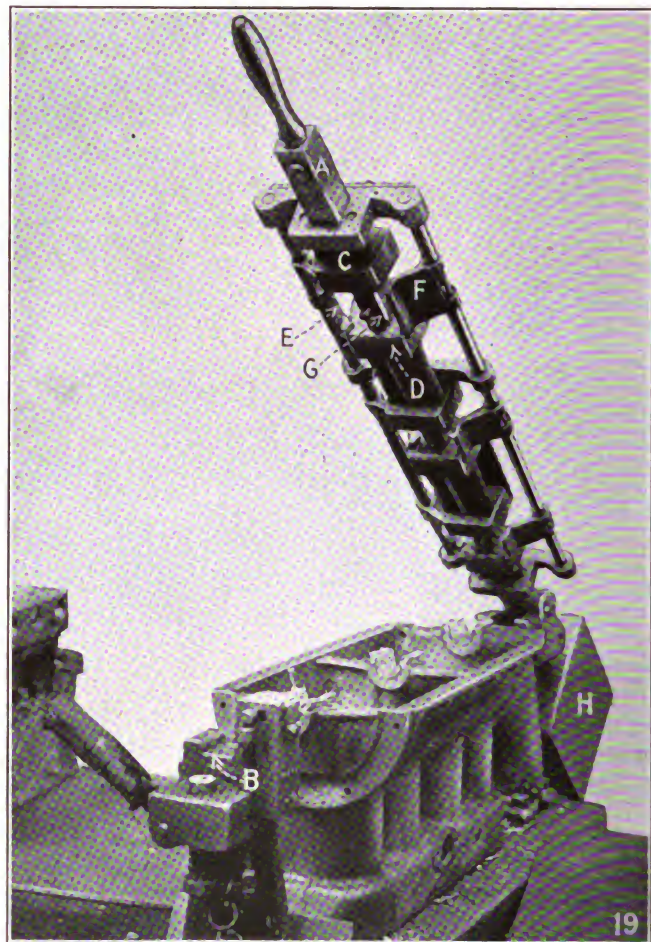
Fixtures used in babbitting main bearings. Note counterbalance weight H.
